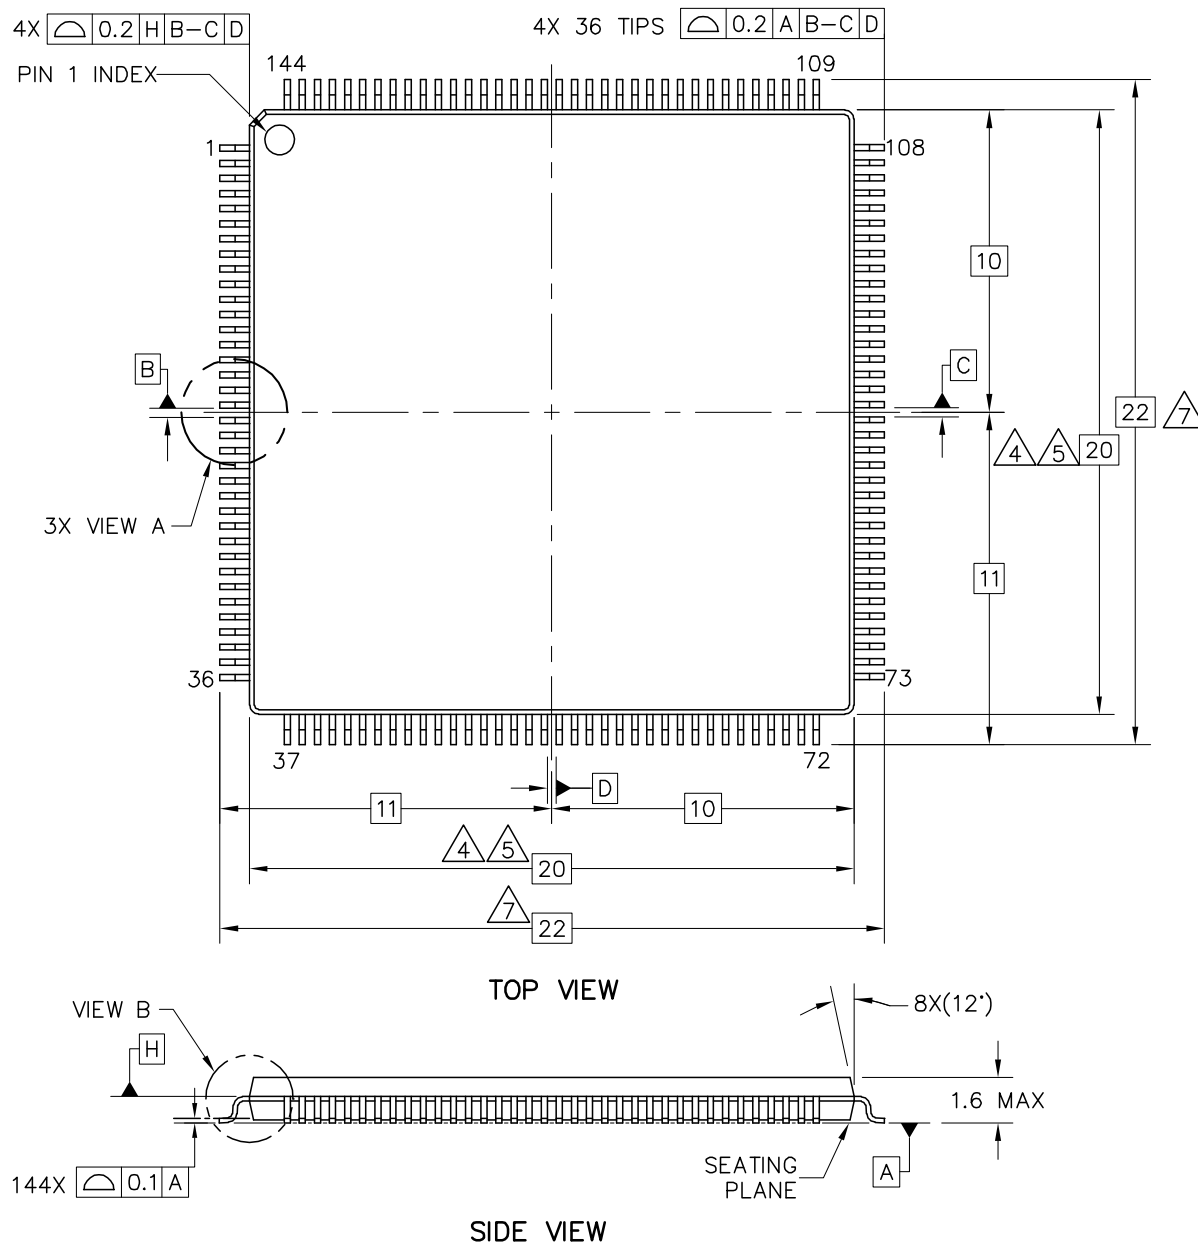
MCF5207CAB166 Package Dimensions (Sheet 1 of 2)
